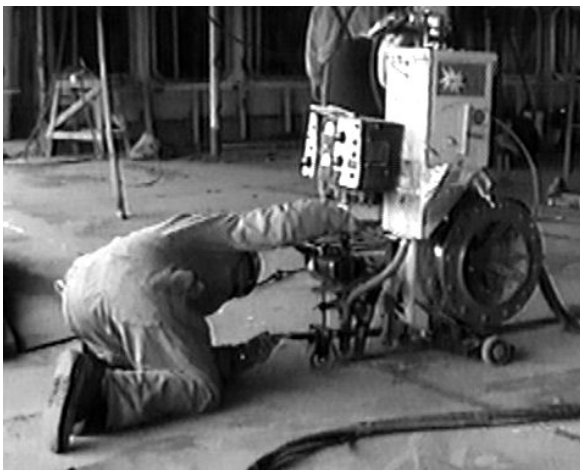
Worker Setting Up Semi-Automatic Wire-Feed Welder
